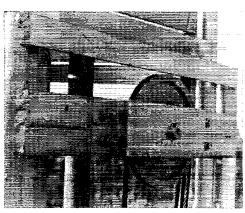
The pulley mounting is made of %-inch steel. In this instance, the mounting bar is a double length of 1½-wide stock, but it can be made of a single piece 3 inches wide. If a shoulder is not provided on the pulley shaft, washers should be used between the pulley and the sheath to provide clearance for the pulley. The pulley shaft should be not less than ¾ inch in diameter.
